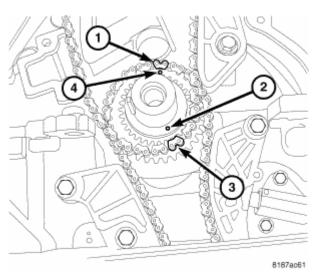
Crankshaft Timing Marks Courtesy of CHRYSLER LLC
